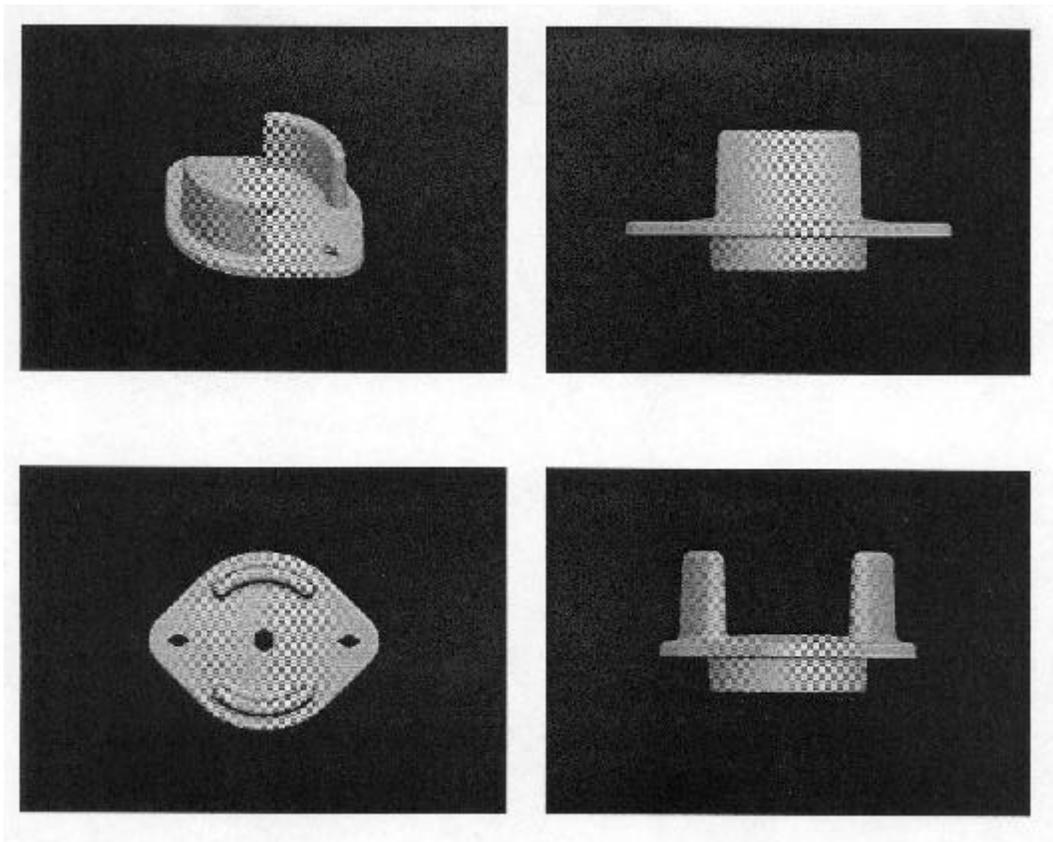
Modified hand hole cover / couvercle de trou de main modifié
